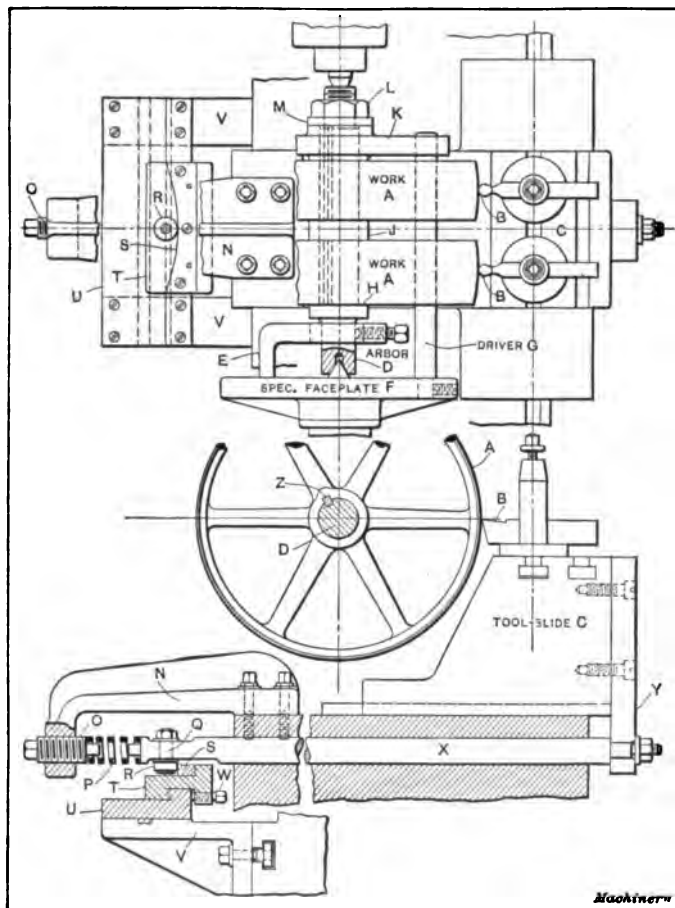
Pulley Crowning Attachment for Engine Lathe
